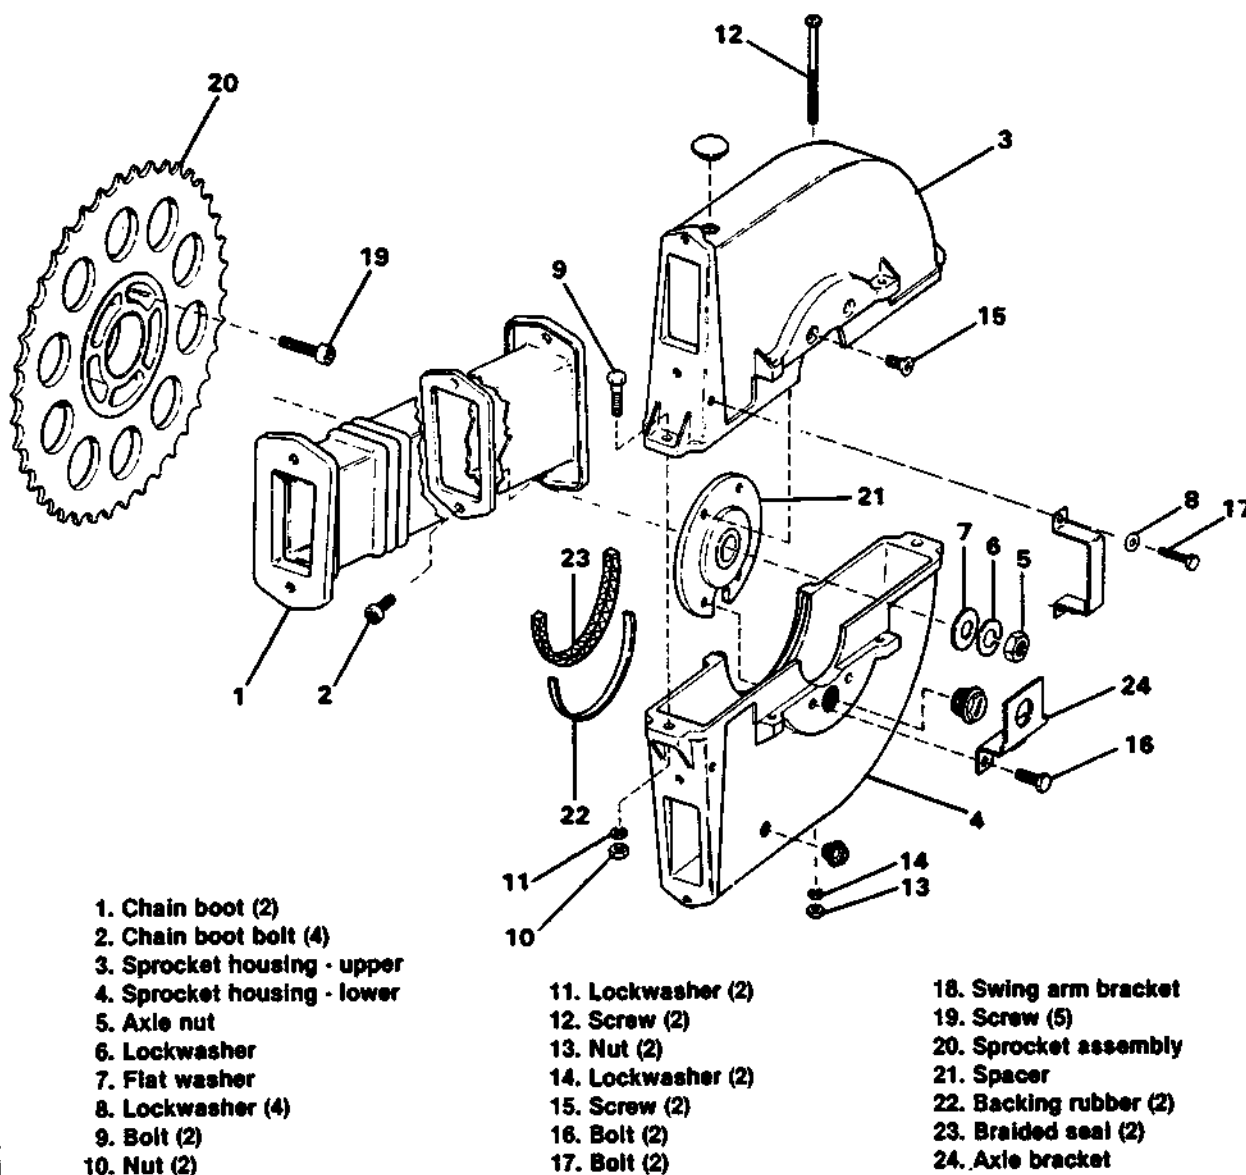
Rear Wheel Sprocket & Housing — Exploded View
